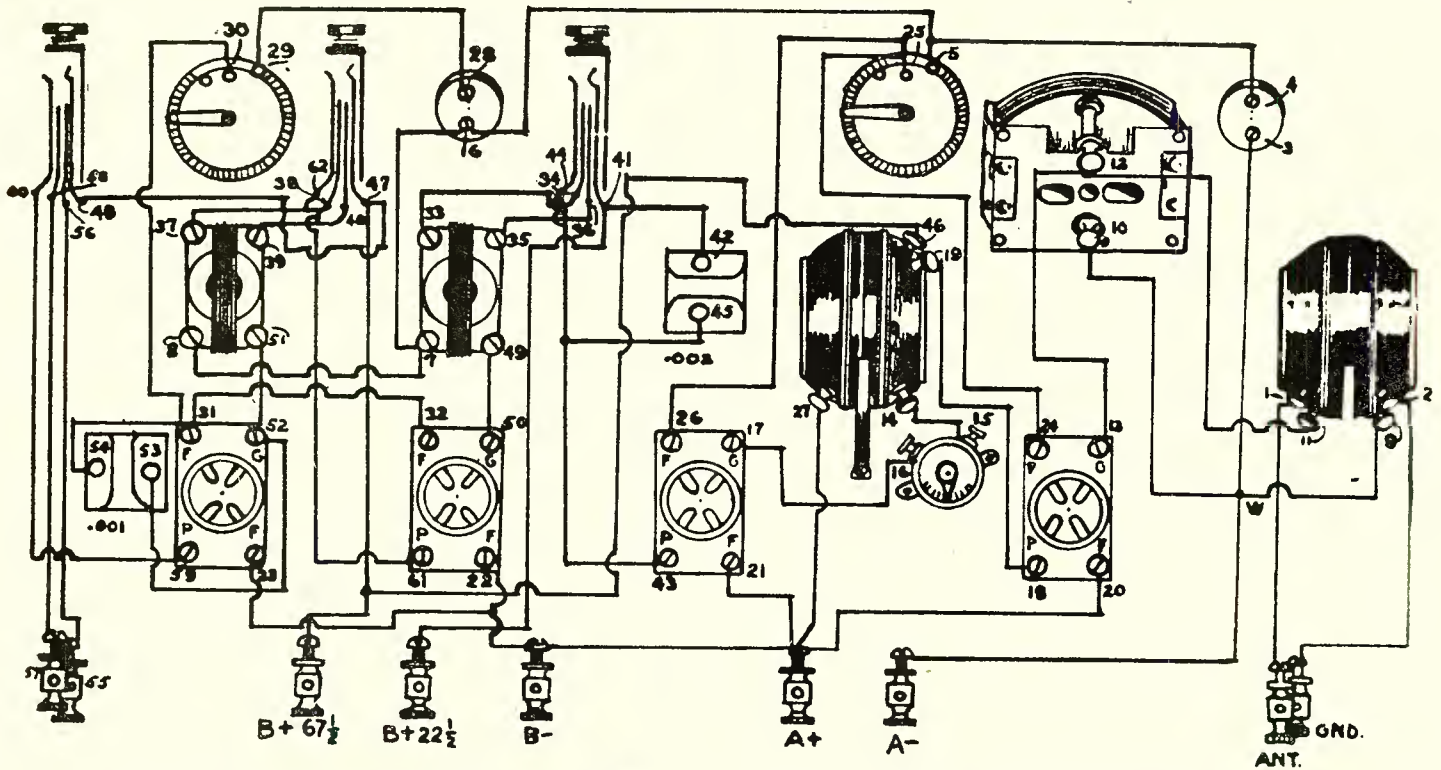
This picture drawing illustrated the appearance of the Concert Selector when completely assembled and wired
